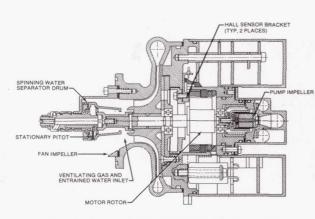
FAN/PUMP/SEPARATOR ASSEMBLY.
